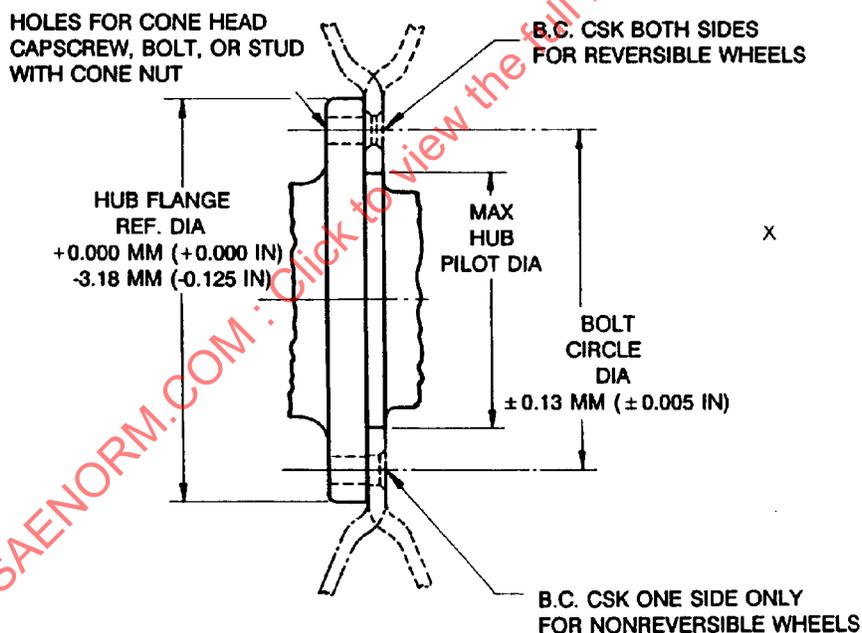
HUB FLANGE FOR CIRCLE FARM EQUIPMENT DISC WHEELS
